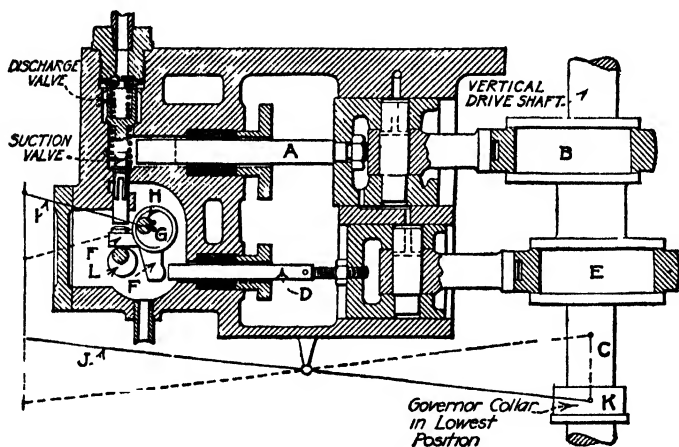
Busch-Sulzer Type B Diesel fuel pump.
